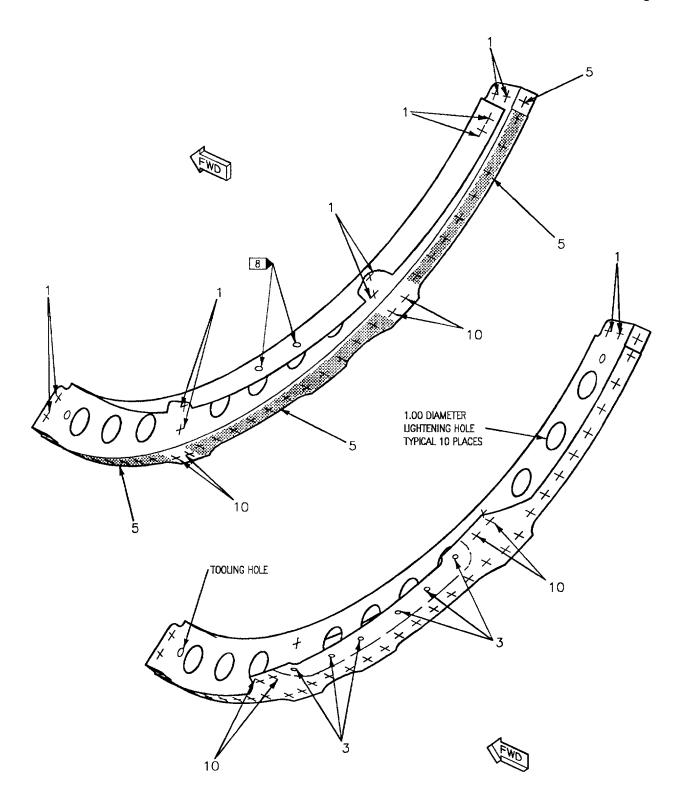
Former, 74A313048, Fastener Index (Sheet 1)
